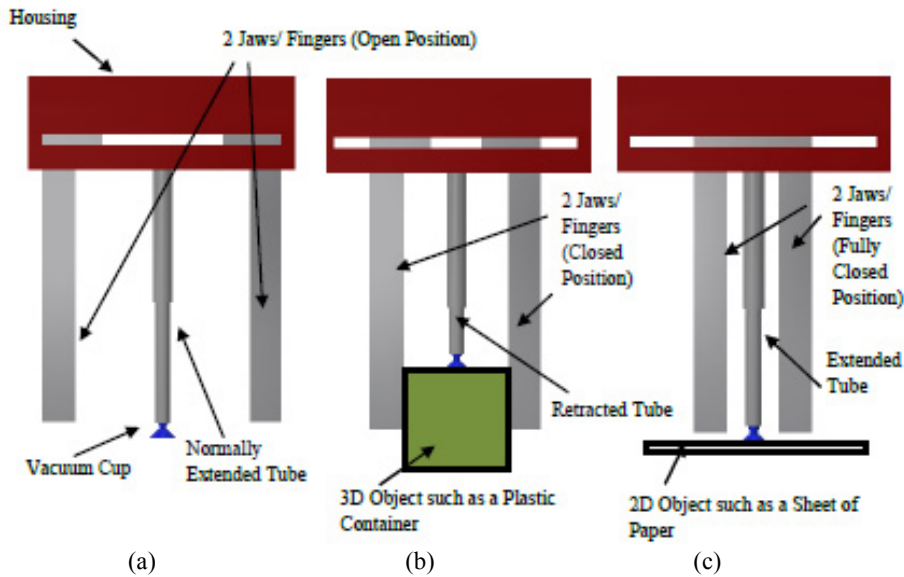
(a) gripper normally open with extended vacuum tube; (b) gripper grasping 3D object using jaws, aided by vacuum cup held by partially retracted tube; (c) gripper grasping a 2D object using the vacuum cup.
